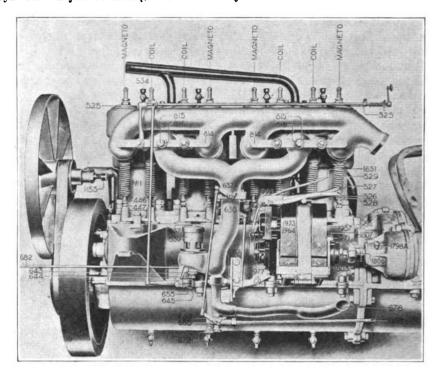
THE CARBURETOR SIDE OF THE MOTOR
